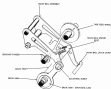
BALL JOINT LEFT BEARING CAP ASSEMBLY
